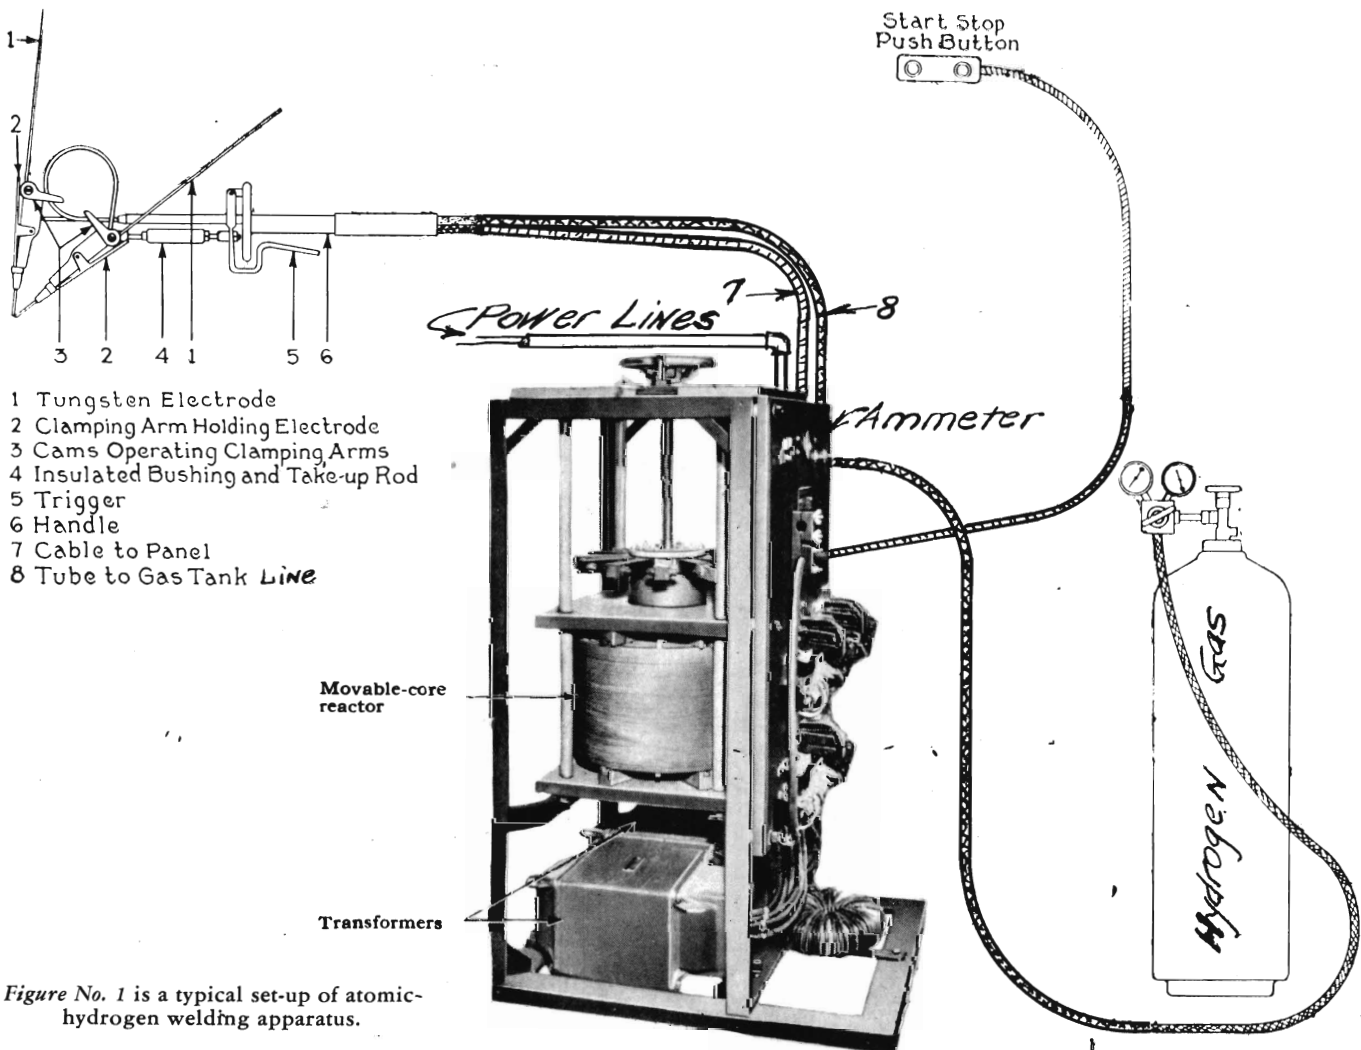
is a typical set-up of atomic-hydrogen welding apparatus.
